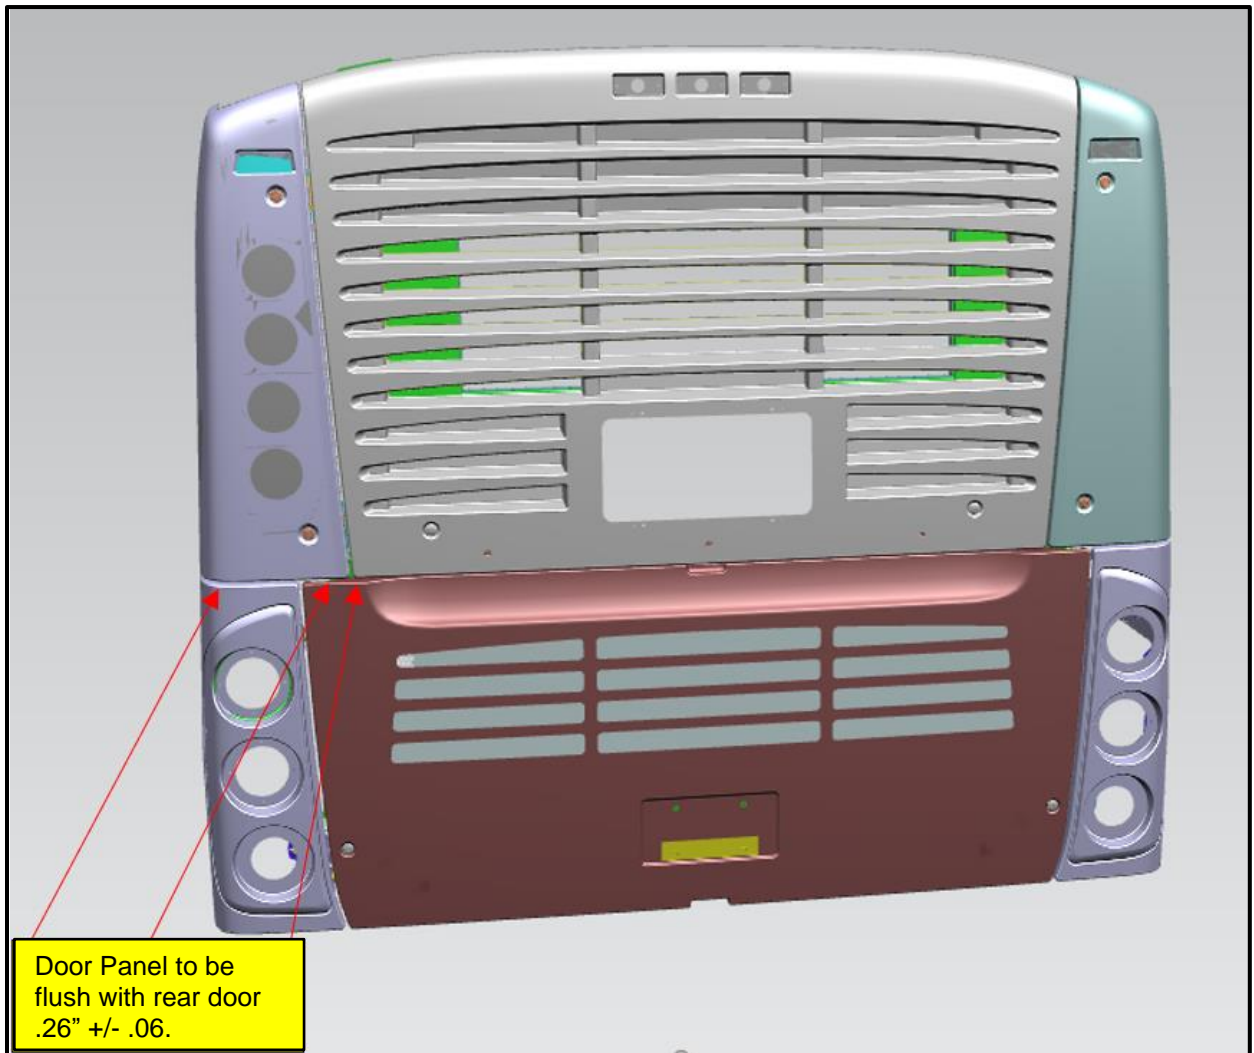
Adjustment of Corner Pillar Access Door Location Reference.
